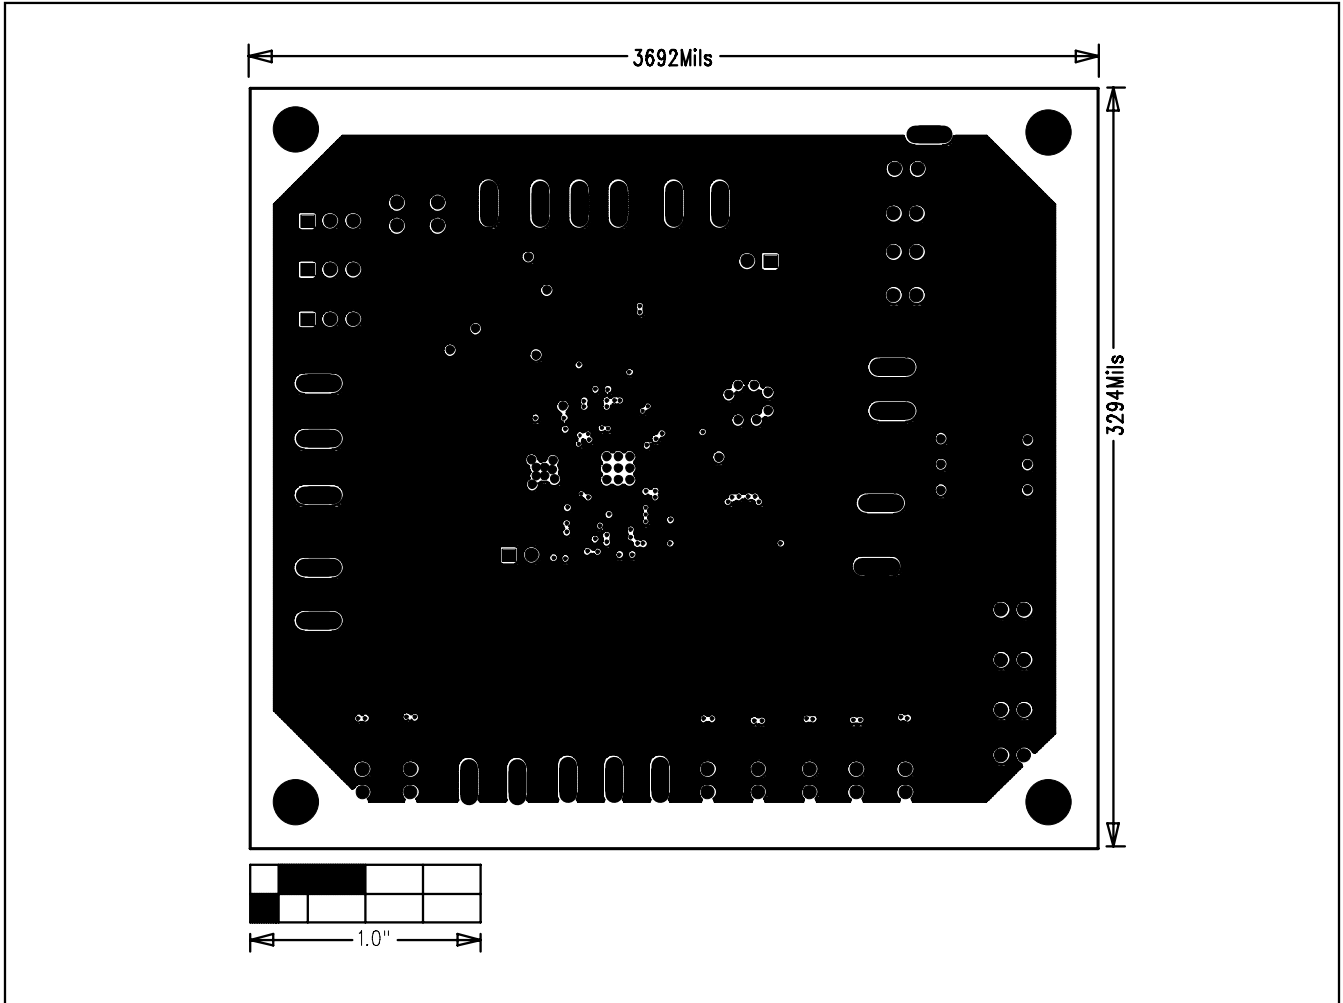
MAX8662 EV Kit PCB Layout—SYS Power Layer 3
